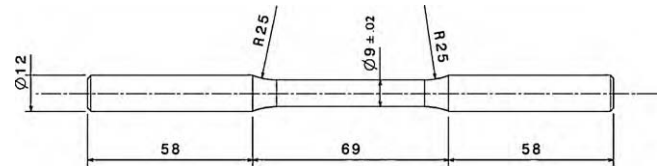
Fatigue specimen geometry (dimensions in mm).
